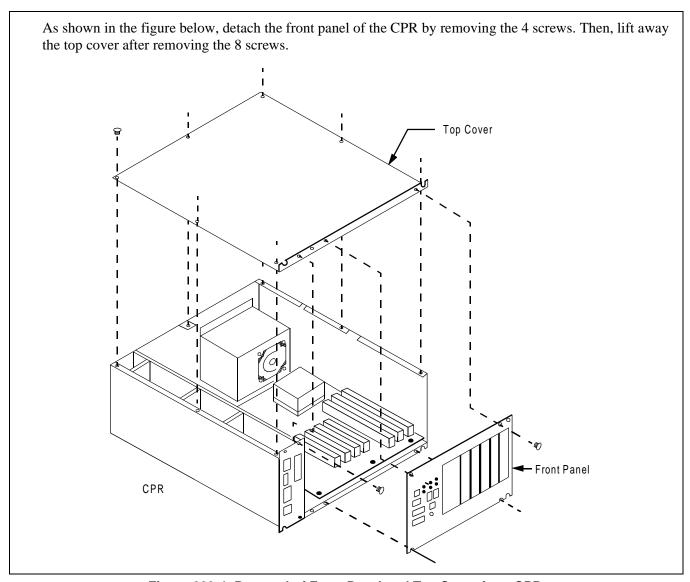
Removal of Front Panel and Top Cover from CPR
